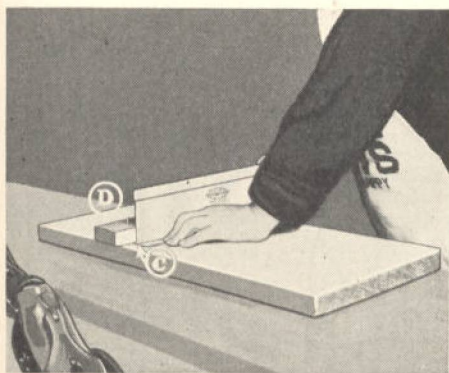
Making cut in stopped dado joint with Atkins SILVER STEEL Back Saw No. 2.
